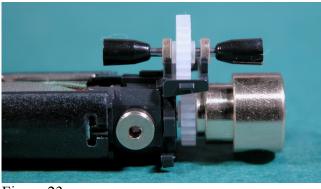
The transmission is placed in the motor bracket after the black u-joints have been carefully placed back on the transmission shaft. You don't want that gear to be moved once it is glued to the shaft. The round bearings go in the slots. Be gentle.
